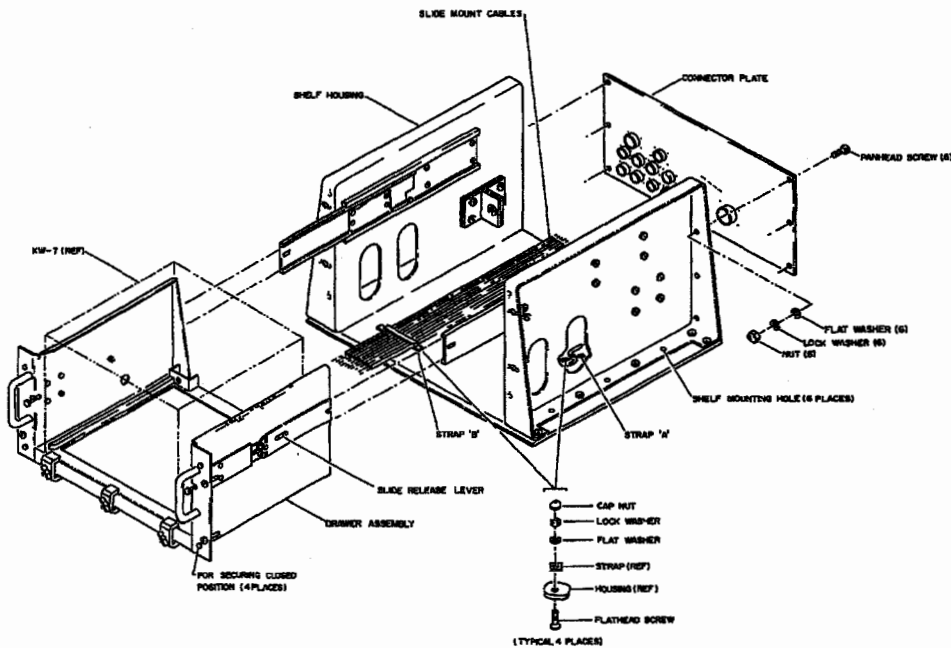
Pivotal Slide Mount, Shelf Type Mounting.
